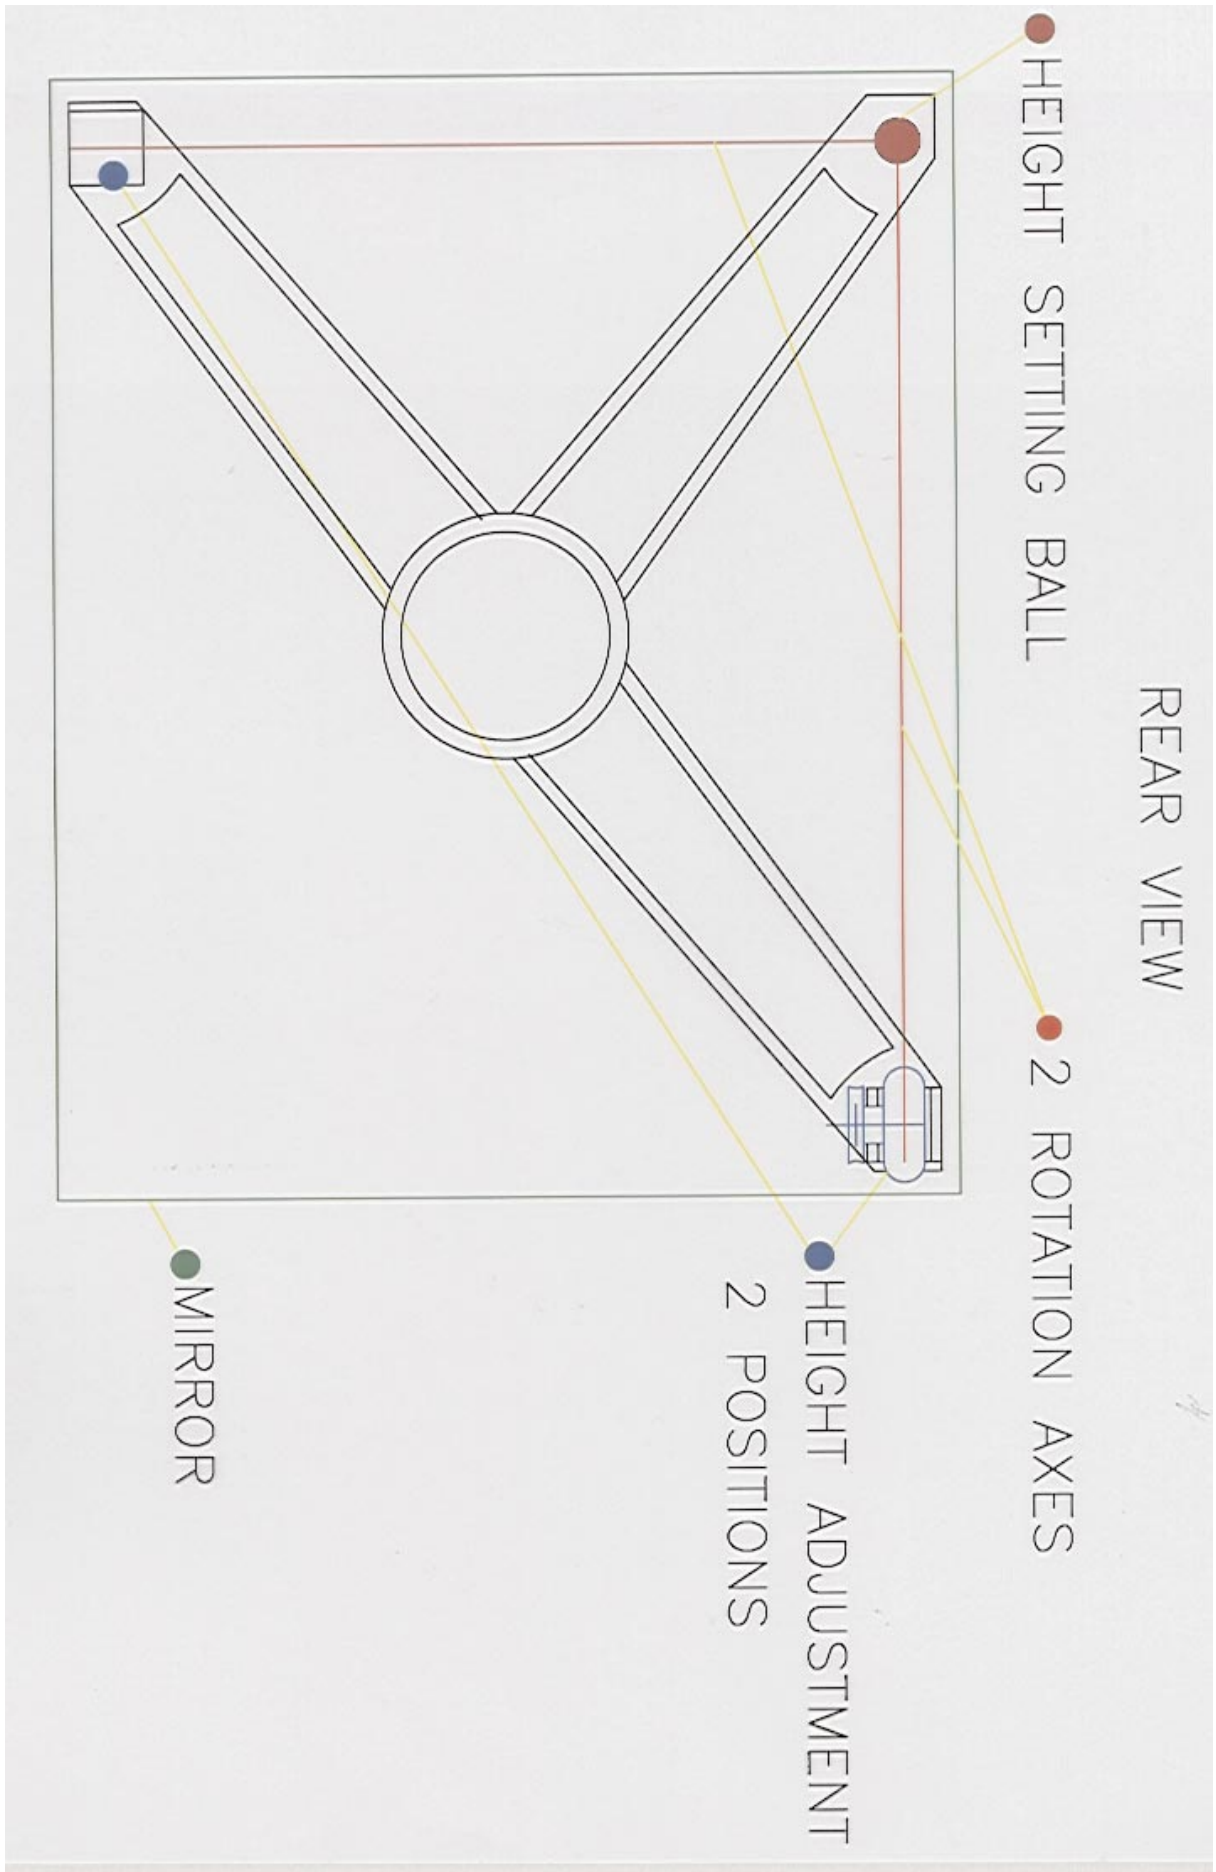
Rear view of one of the mirrors showing the mounting mechanism.
